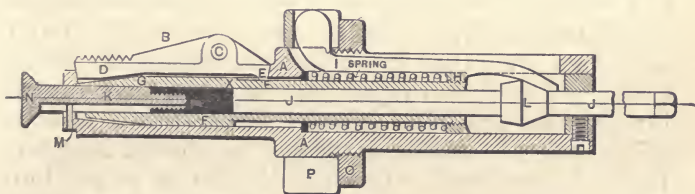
COLLAPSING TAP. (HANCOCK INSPIRATOR CO).
